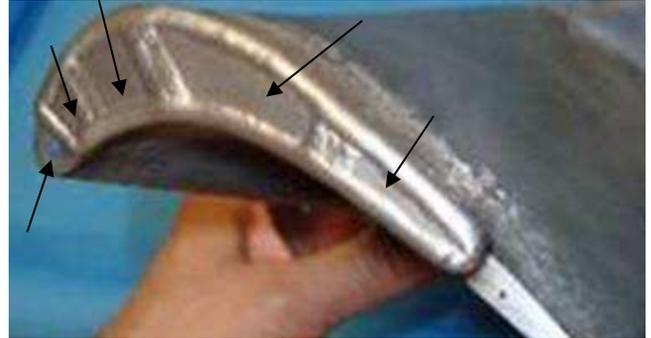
Five new chicklets GTA welded on the tip of the bucket to close the core cavities
